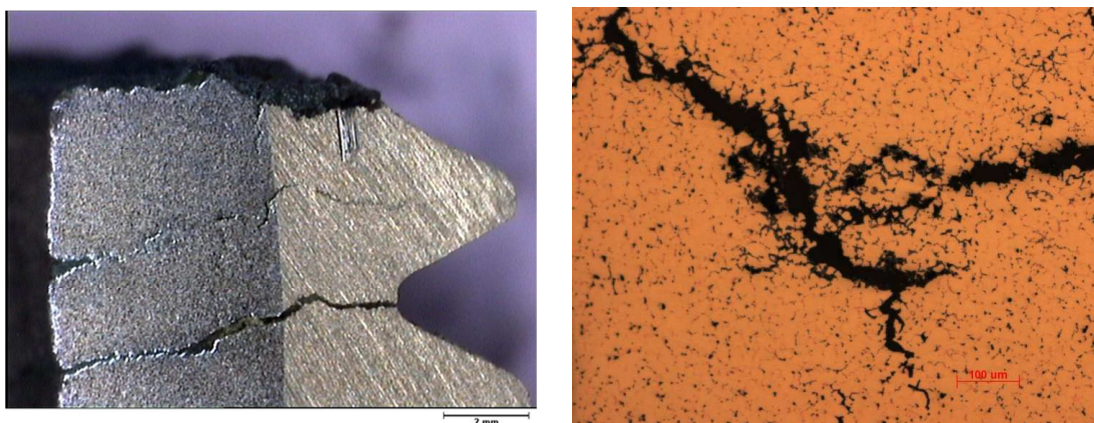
Stress corrosion cracking in brass caused by to high moment during assembly
